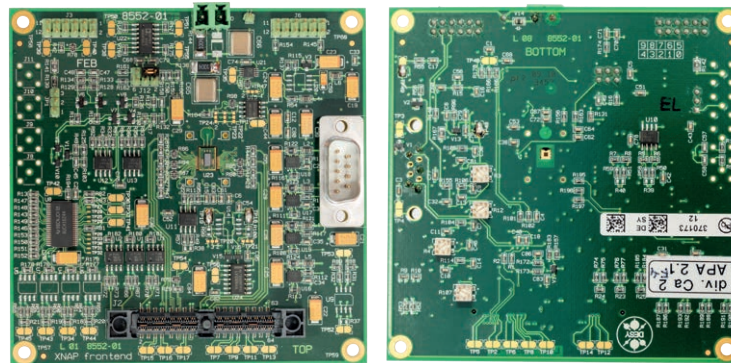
Frontend boards made by DESY. Left, the top side where the interposer is glued to. On the right, the bottom side is shown with the sensor in its mounting hole.
